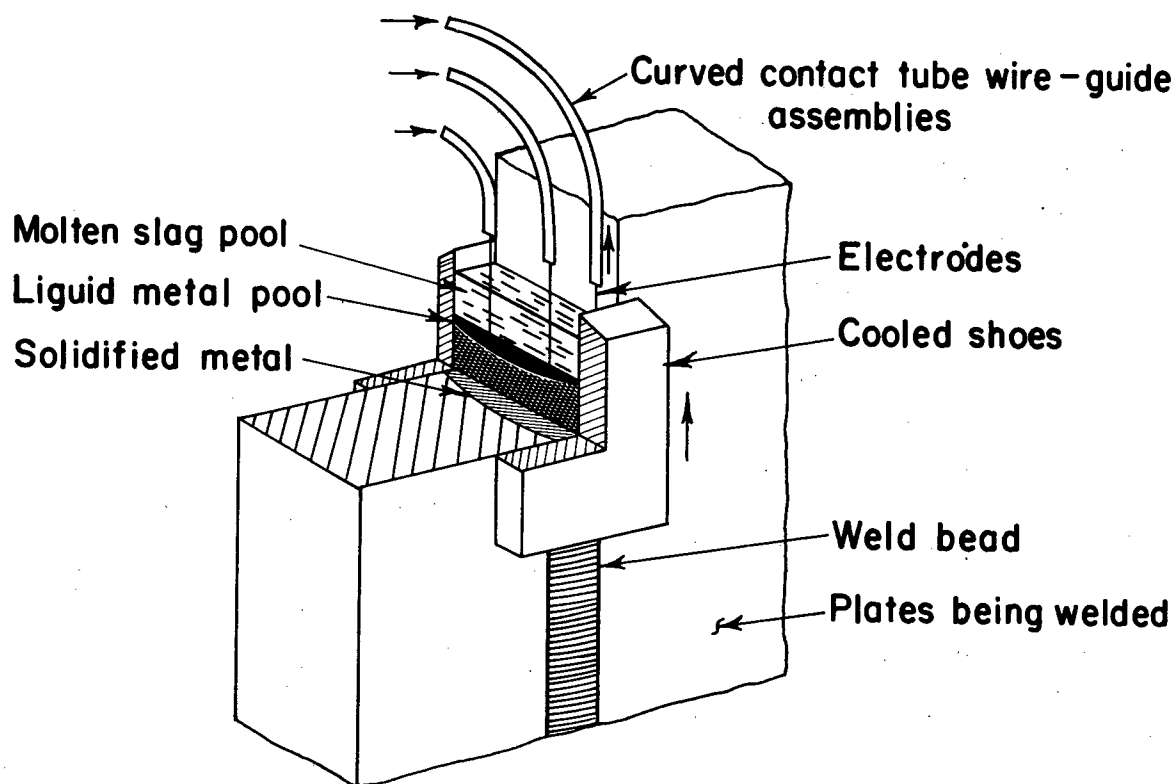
SCHEMATIC VIEW OF CONVENTIONAL ELECTROSLAG WELDING PROCESS
